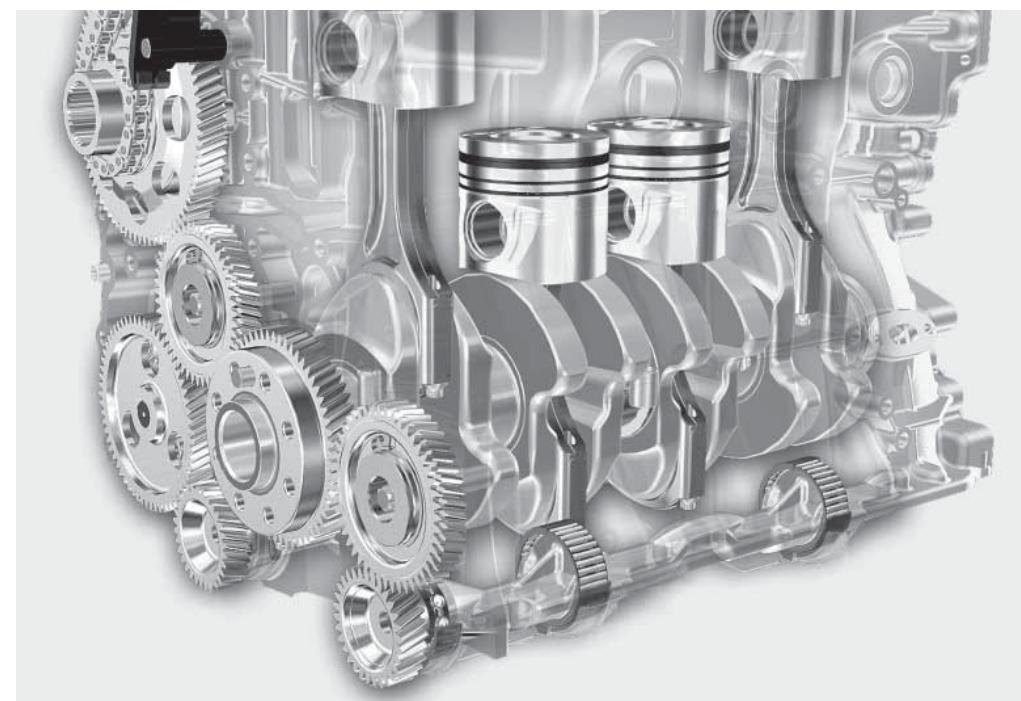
Optimized balance shafts in the Daimler OM651 engine
